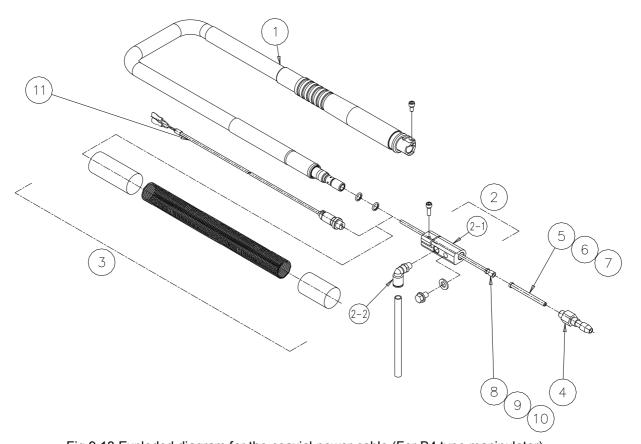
Exploded diagram for the coaxial power cable (For B4 type manipulator)
